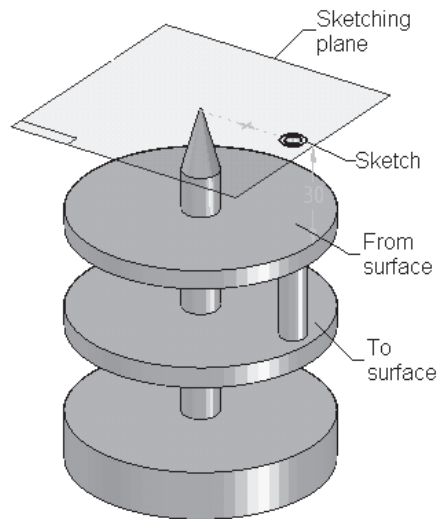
Extruding the sketch using the Through Next option
